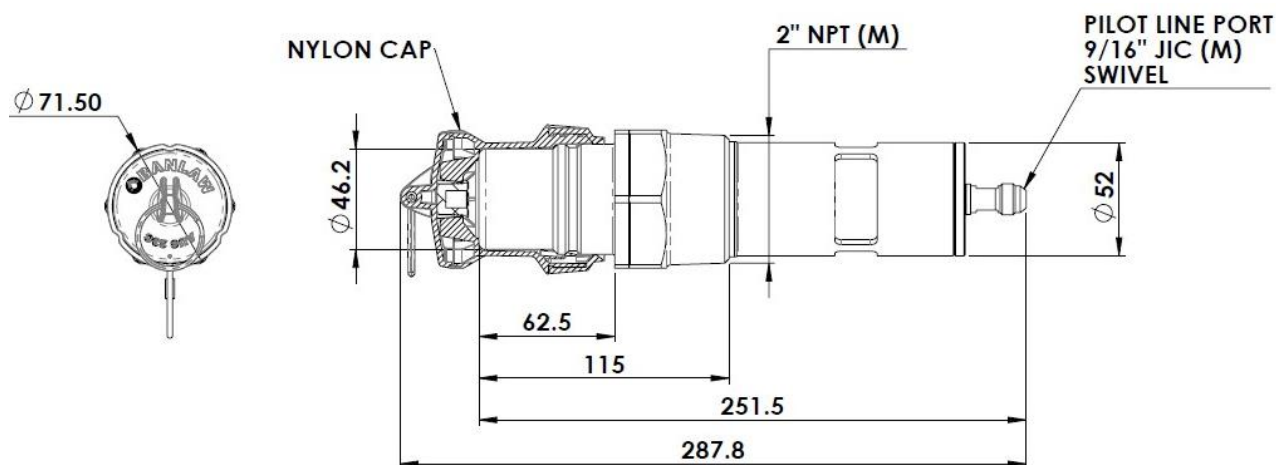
Overall Dimensions of Valve (including Receiver Dust Cap)
